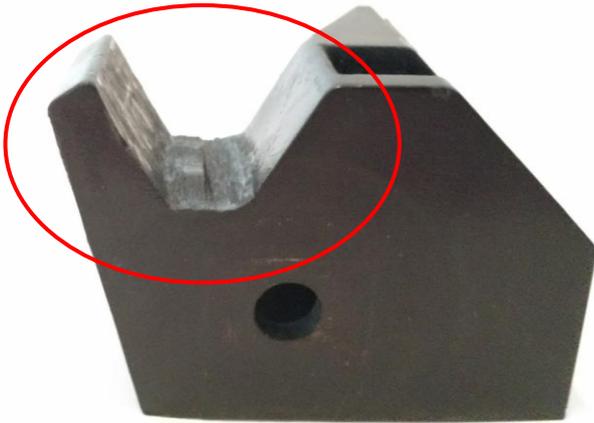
Traces of wear of the engine cover latch - catch pawl housing [6]
